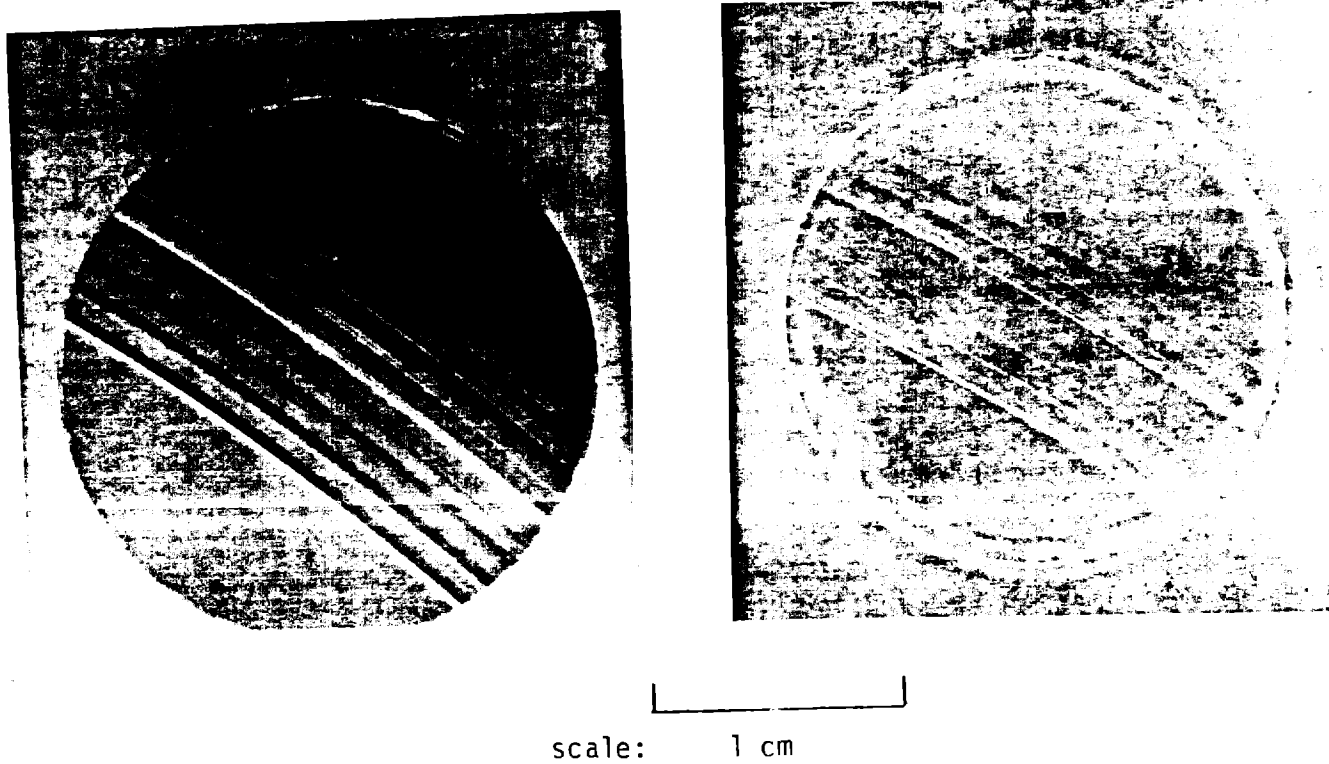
A precision machined R-T target mold and a replicated polystyrene layer by liquid molding technique
